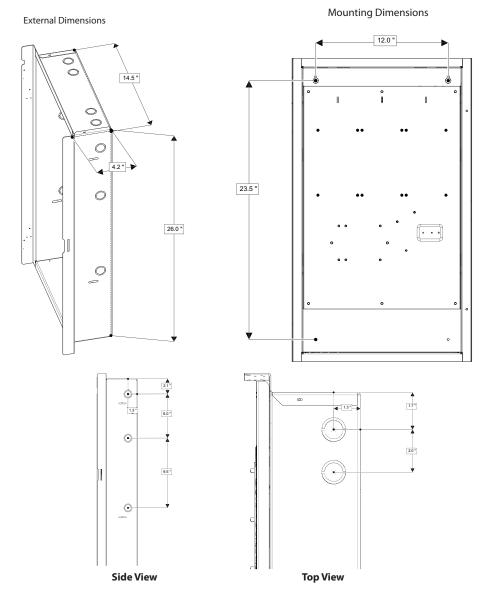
UB-1024DS Backbox Installation Instructions and Dimensions
